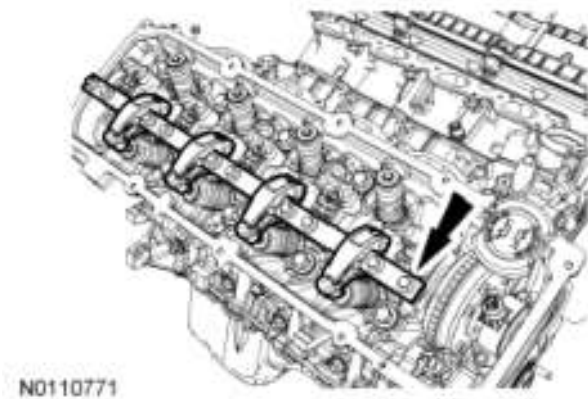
Locating RH Exhaust Rocker Arm Shaft Assembly
